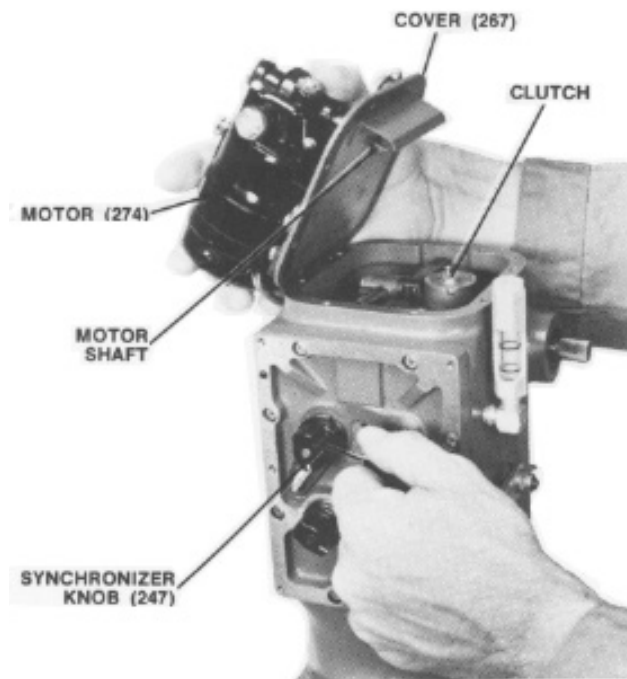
Installing Cover with Bodine Synchronizer Motor
